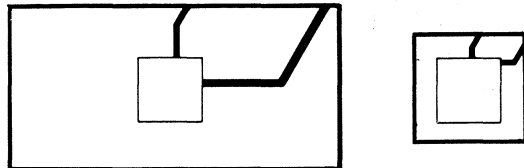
EXPLODED VIEW OF CHIP CARRIER AND DIP
